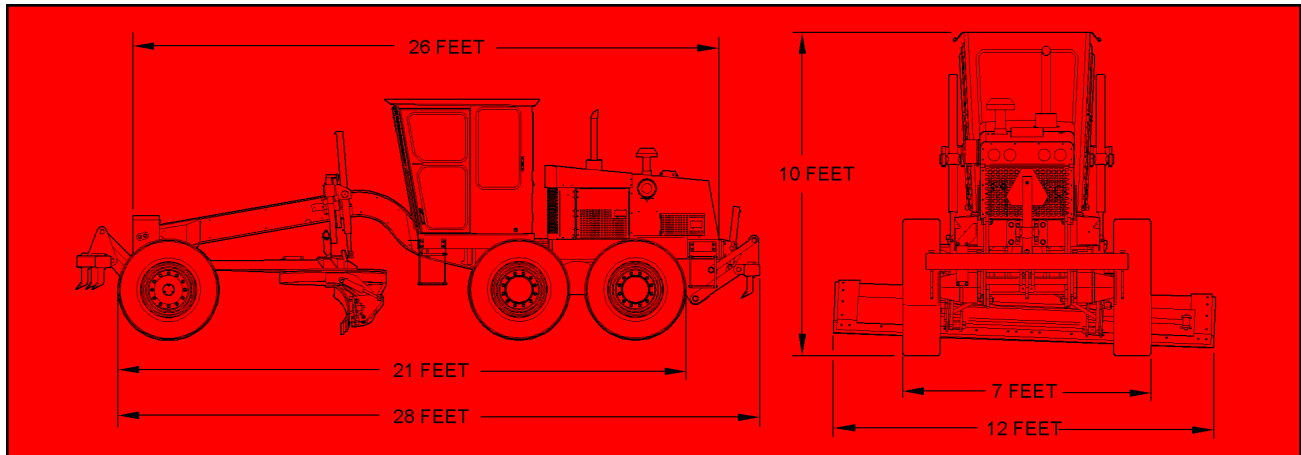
OUTLINE DIMENSIONAL DRAWING
